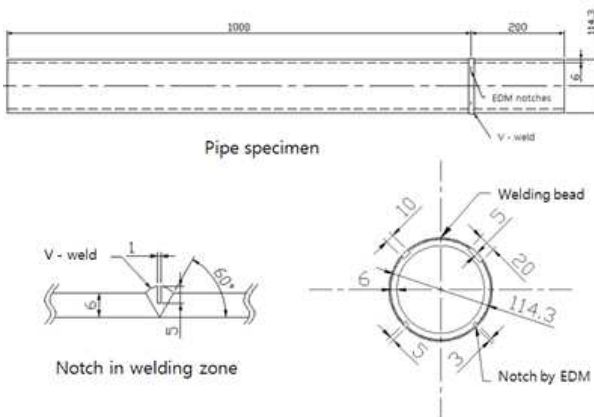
Drawing of a pipe specimen and notches in welded zone
